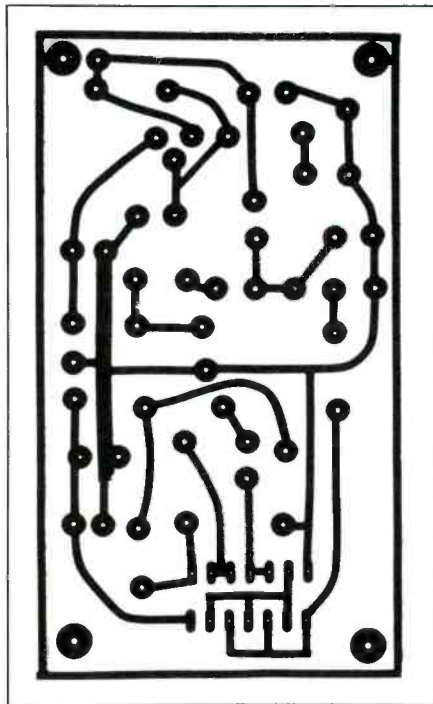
Actual-size etching-and-drilling guide for fabricating a pc board.
